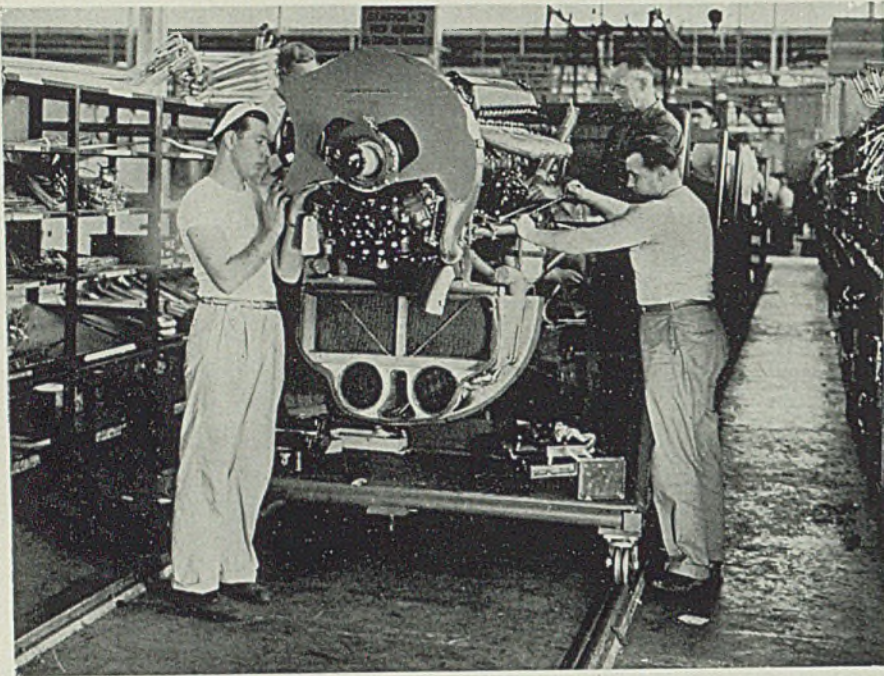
Closeup of dollies with V-casters employed on engine assembly line
